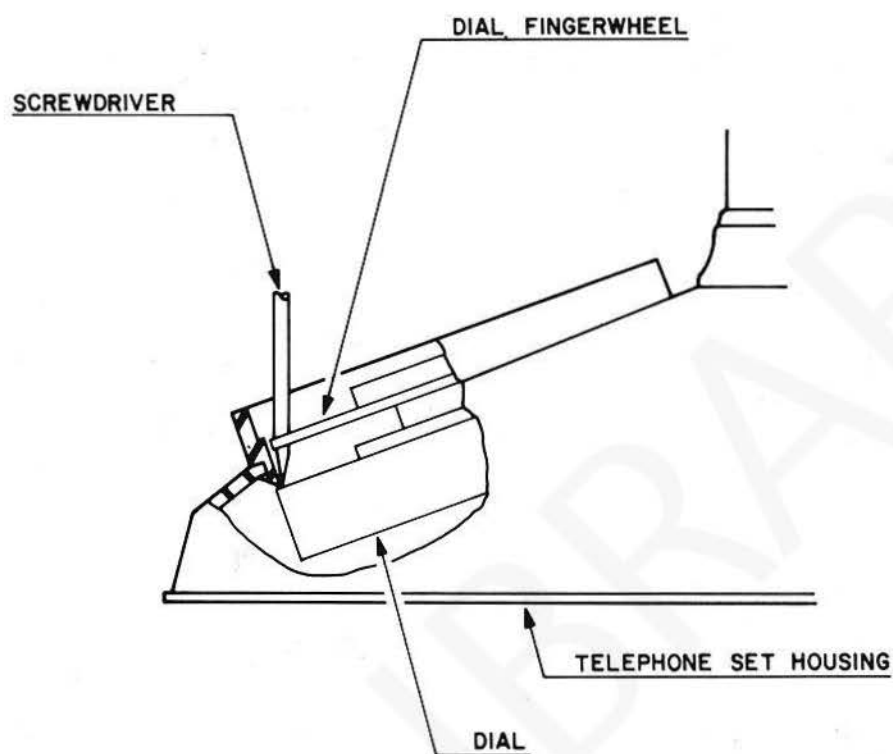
(a) — Installing Housing Assembly, Chart 1, Step 5
